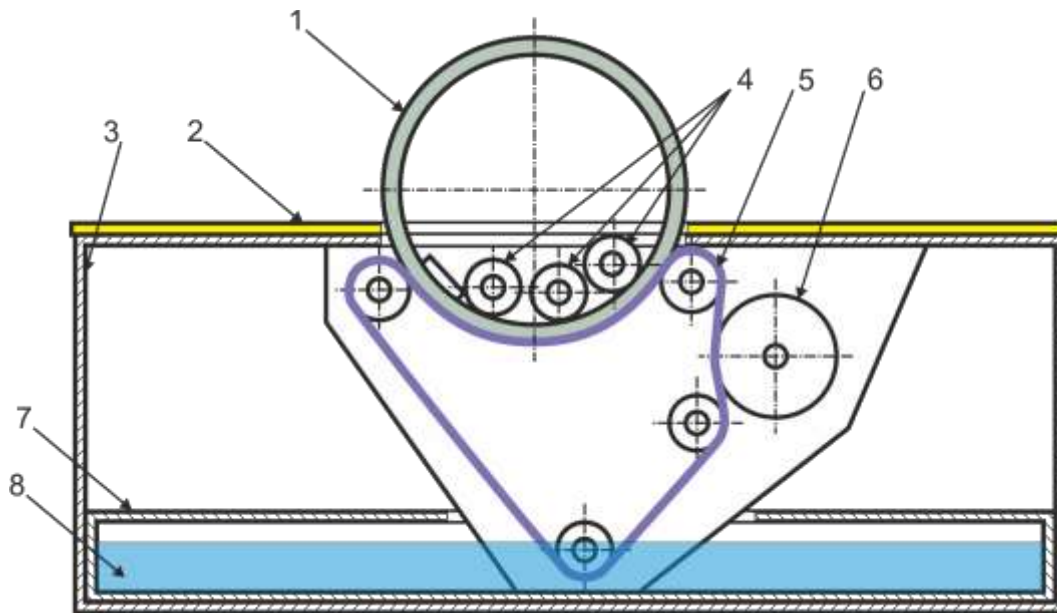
Diagram of diamond ring saw: 1 - DIA ring (string), 2 - work bench, 3 - machine frame, 4 - pulley system for fixing the ring, 5 - drive belt of the ring, 6 - belt drive, 7 - tray with coolant, 8 - coolant
